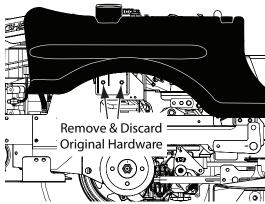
SCZ 48V OCDC Handle Brkt Mounting Holes
